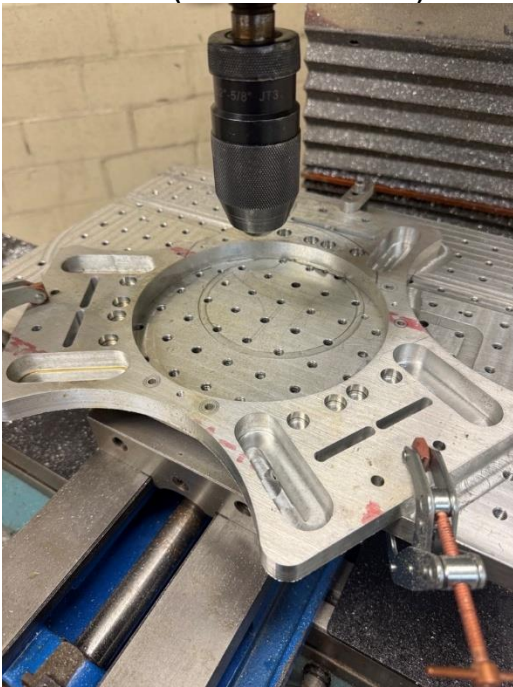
Primary Mirror Mount after being initially cut to size and optimized.
